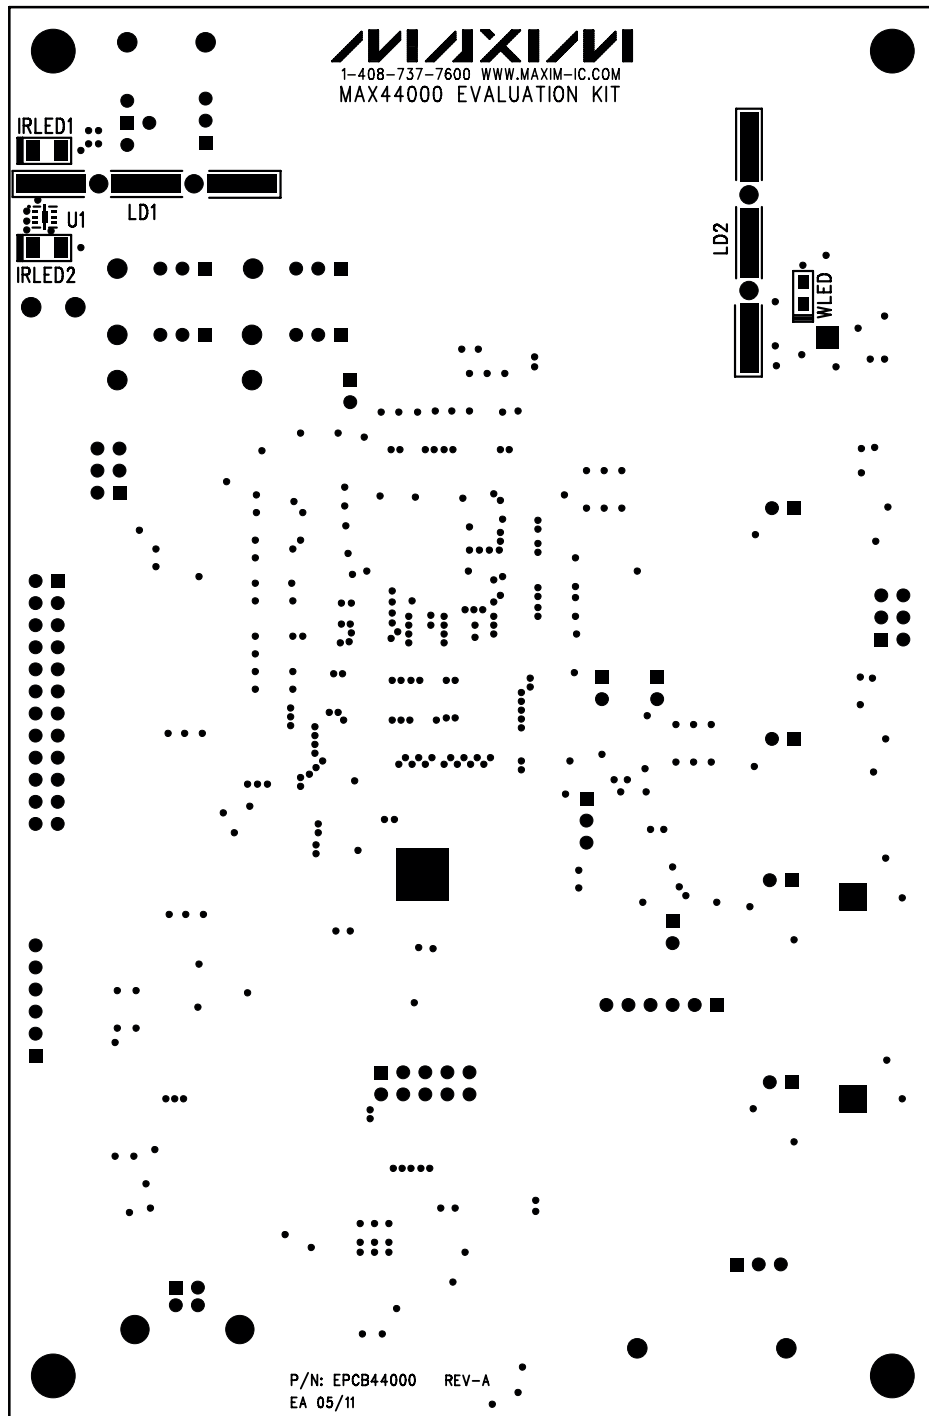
MAX44000 EV Kit Component Placement Guide—Component Side
